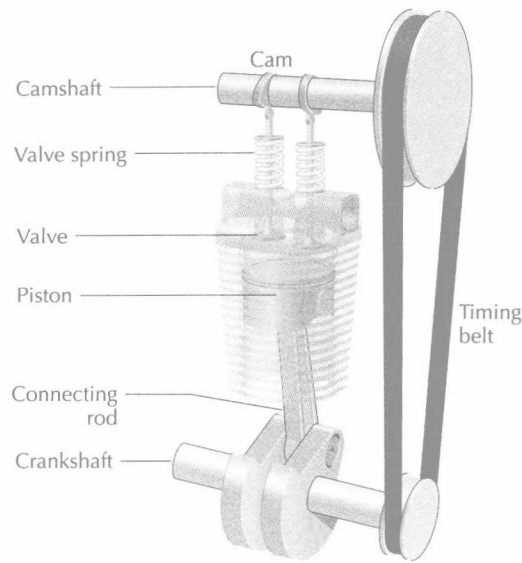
Single-cylinder piston engine [Model 1.1].
